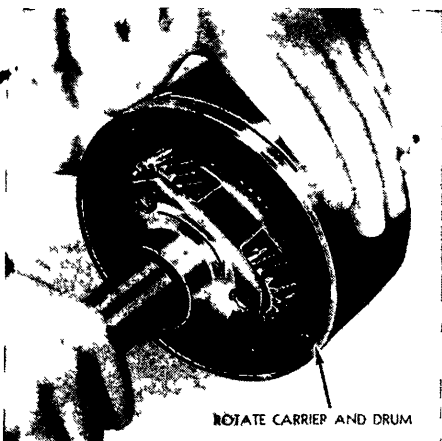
Insert planet carrier into clutch plates by rolling drum on bench while pressing carrier into plates
